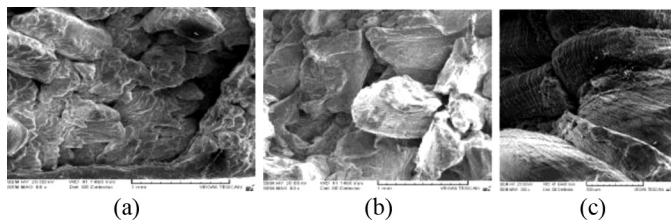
(a) Conventional weldment. (b) Copper strip weldment. (c) Copper particles filled in holes weldment.
